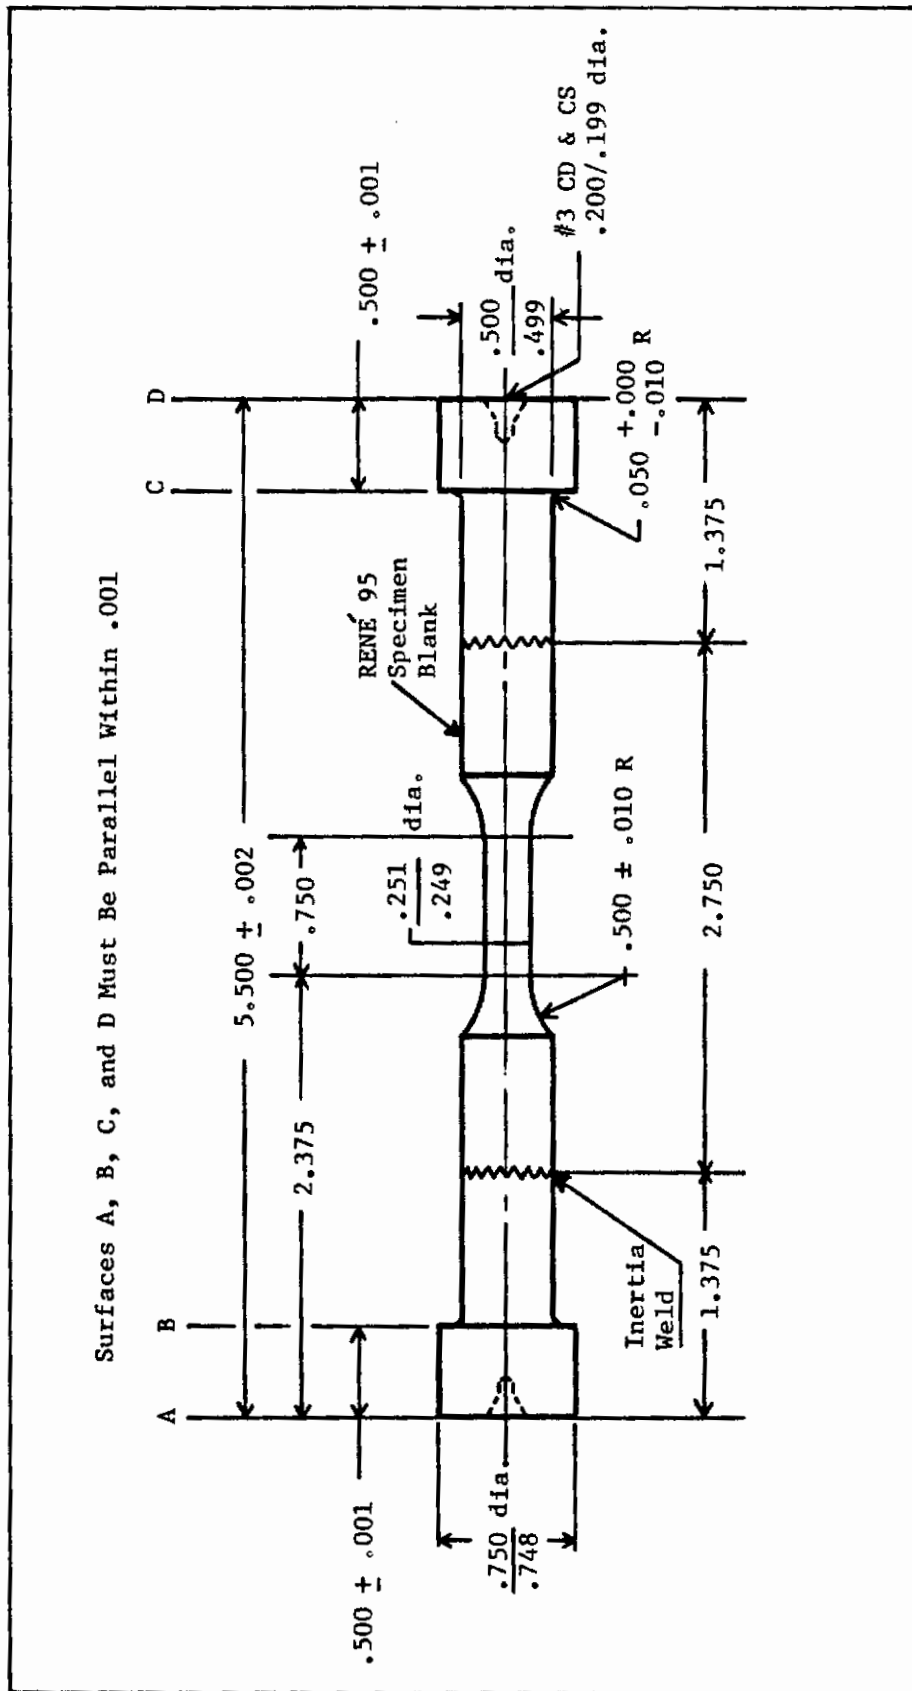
GEOMETRY OF A SPECIMEN AFTER INERTIA WELDING
